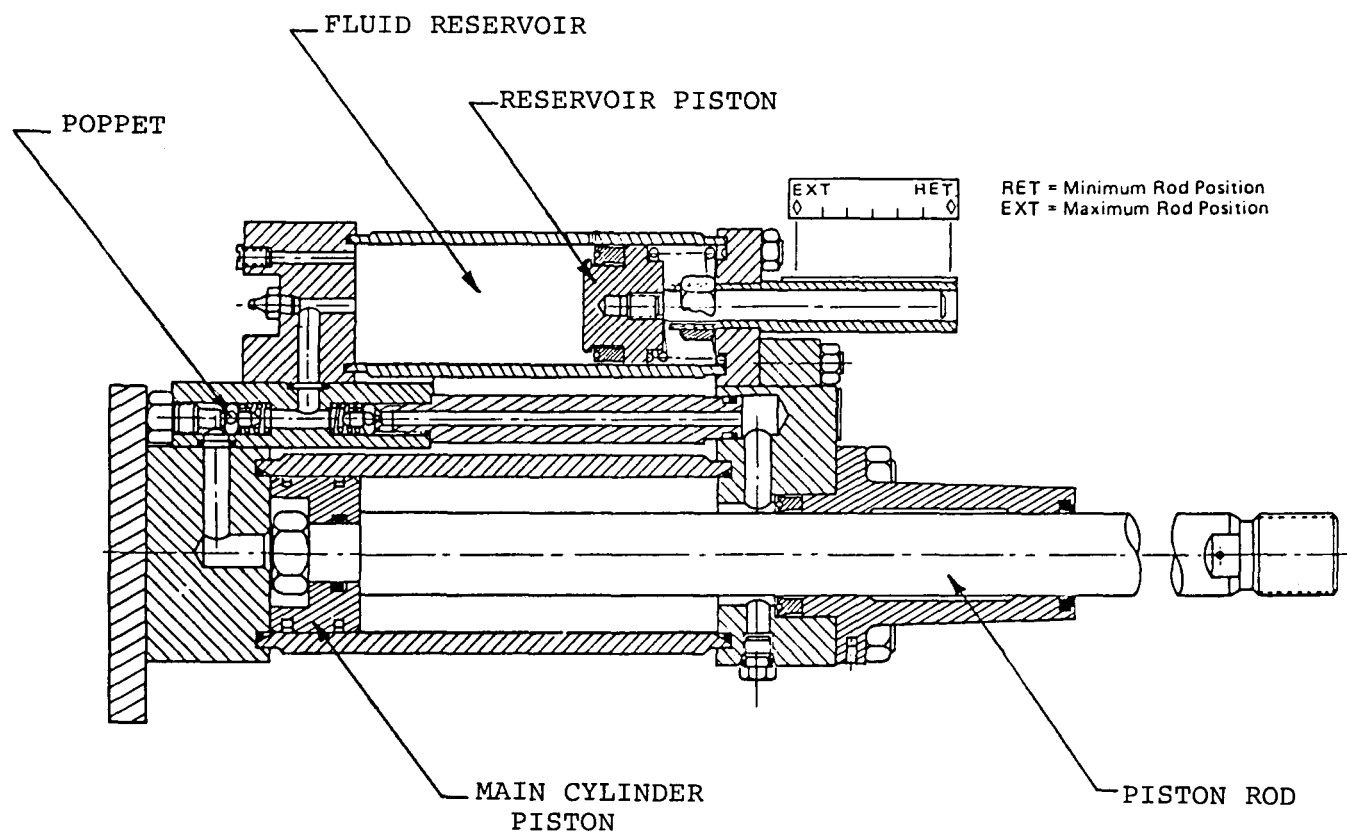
HYDRAULIC SNUBBER ASSEMBLY
